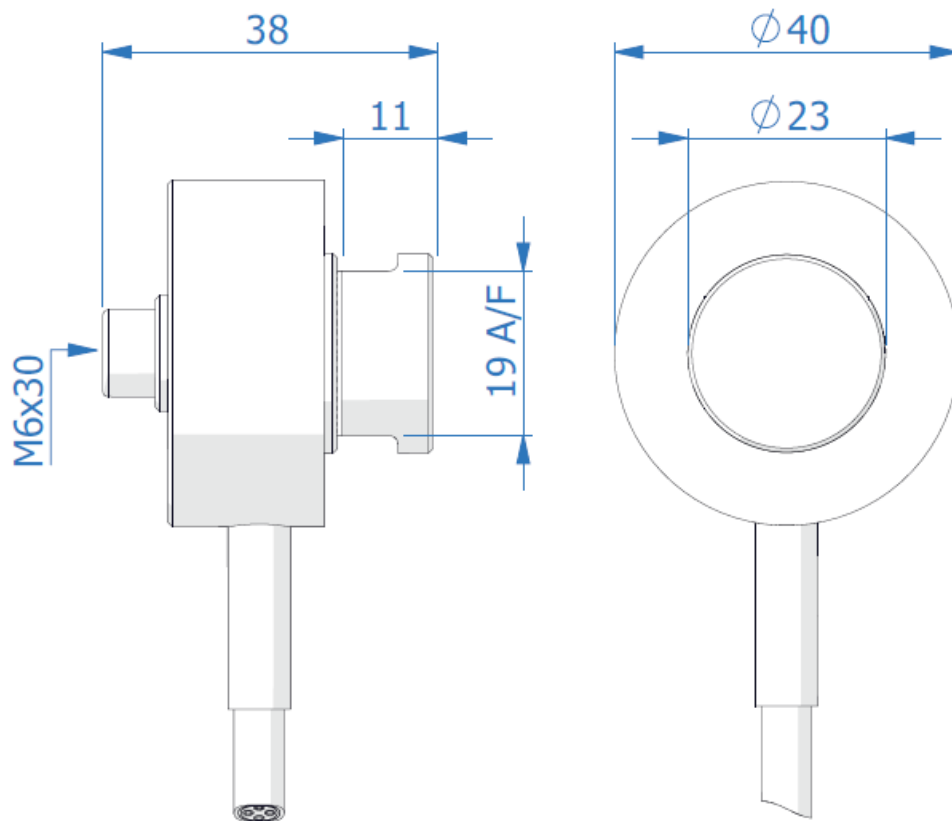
Chemically Bonded Adapter Dimensions (mm)
